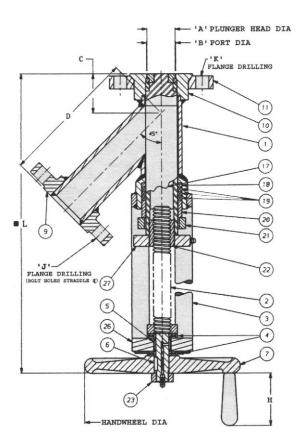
Typical piston sample valve Courtesy of Strahmann Valves France
